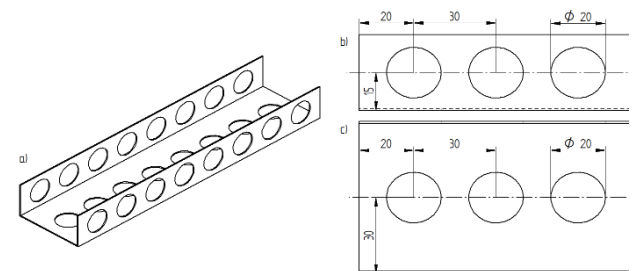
(a) Model C2 with circular holes with a diameter of 20 mm, (b) geometric dimensions on the side wall part, (c) geometric dimensions on the web part
